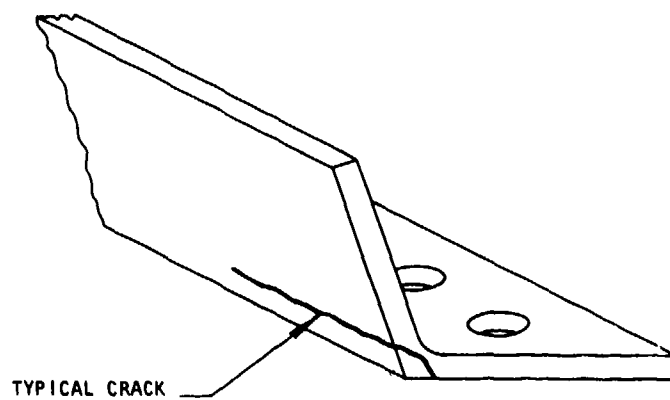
FRONT SPAR LOWER CHORD HEEL CRACKING
